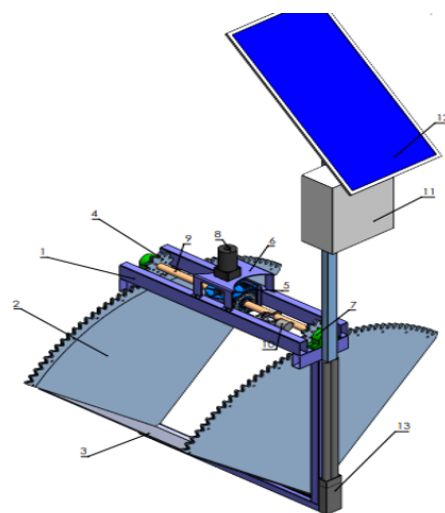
Main Components of the Smart Channel M-1 Device: 1 — Housing; 2 — Side lifting arms; 3 — Sluice gate; 4 — Gear; 5 — Gearbox; 6 — Motor mounting bracket; 7 — Bearing housing; 8 — DC motor; 9 — Shaft; 10 — Encoder; 11 — Control panel; 12 — Solar panel; 13 — Measuring sensors
